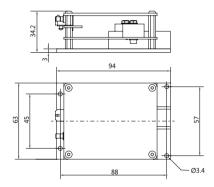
Outline drawing of DPS series drivers with conductive pad
